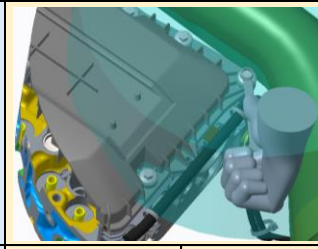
Engine extruded - valve cover access analysis with regular wrench
